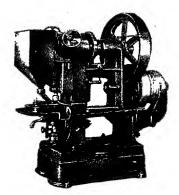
Single-punch tableting machine. Suitable for tablets to perhaps 3-in, diameter. (F. J. Stokes Co.)
